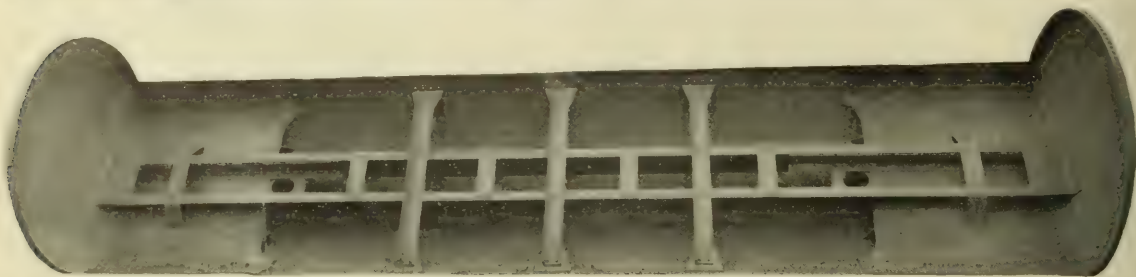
Interior View of Tank Car, Plan A, with 15-Inch Center Sills.
